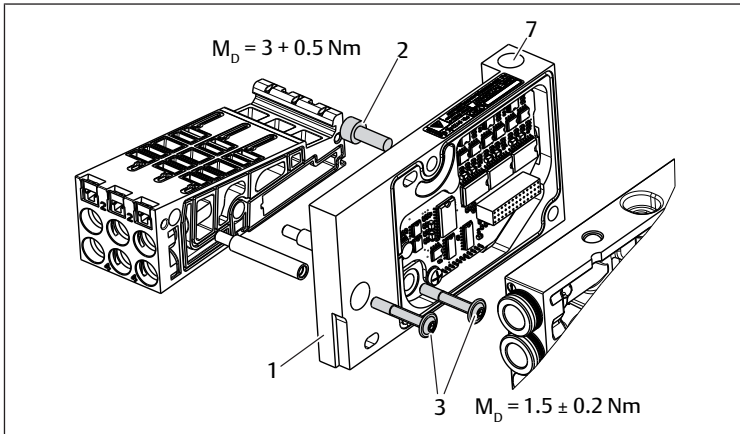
Mount AV05-B-design adapter module to an AV05 base plate
